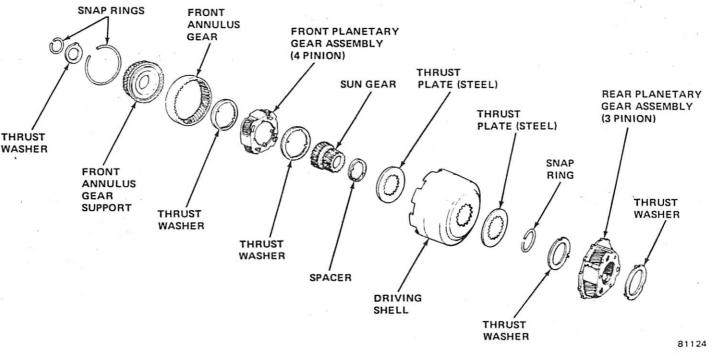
C-84 Wide Ratio Planetary Gear Assembly-Model 999
